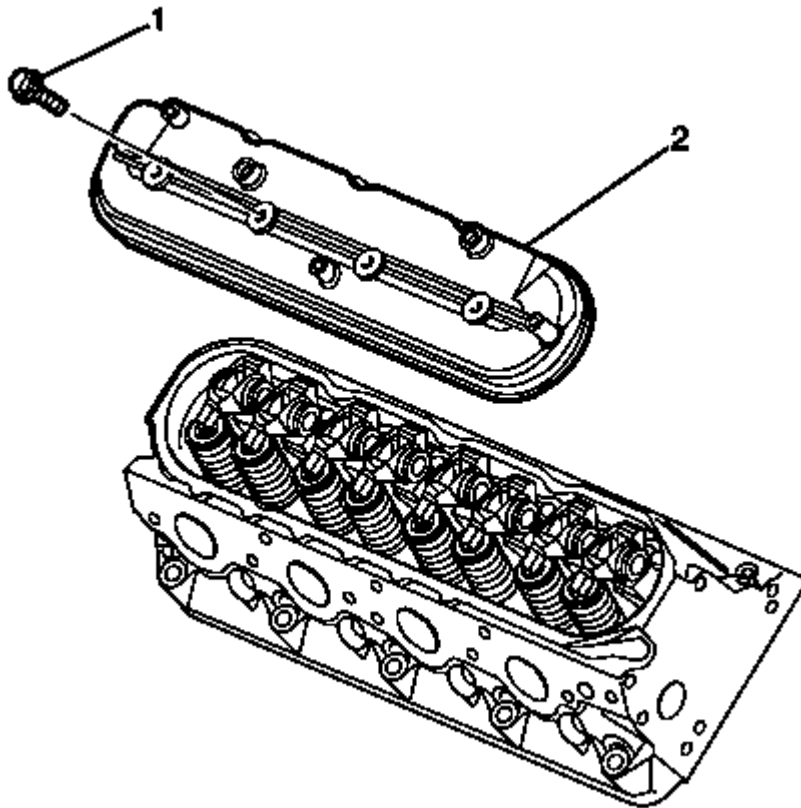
Identifying Valve Rocker Arm Cover To Cylinder Head Retaining Bolts (Left Side)
